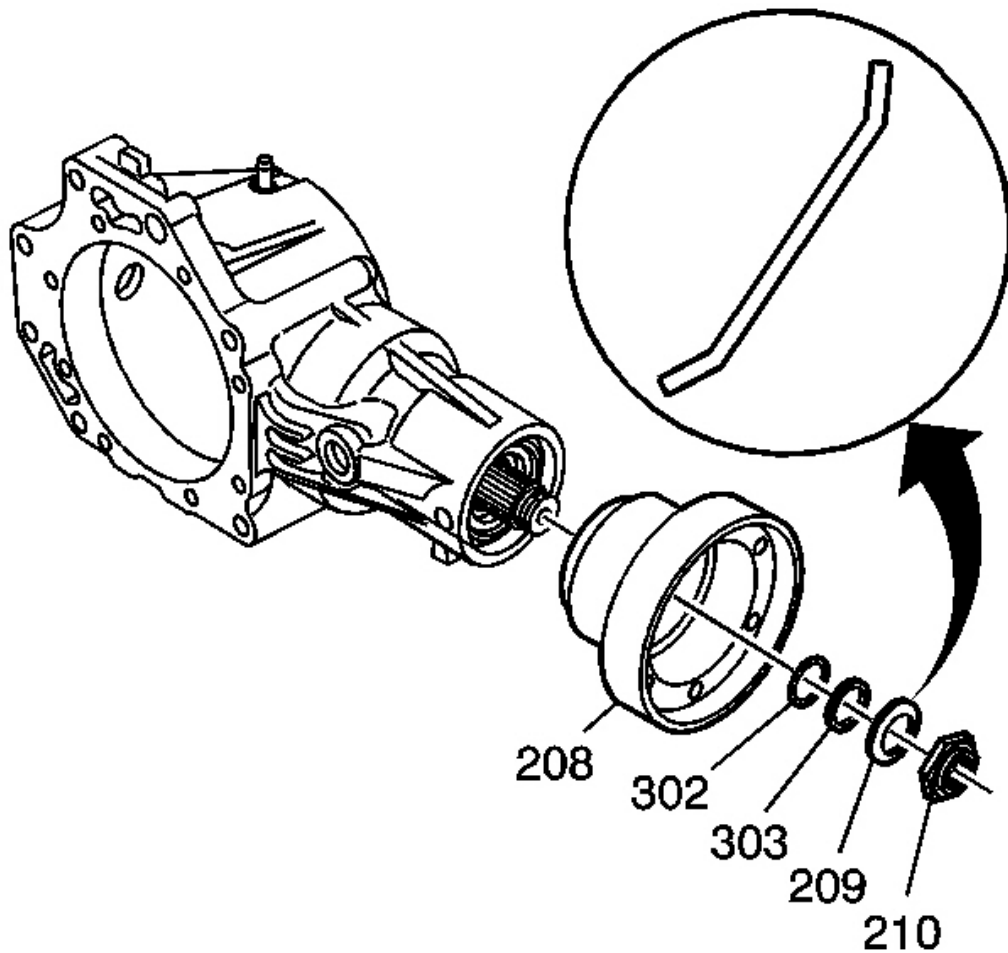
Removing/Installing Locknut, Washer, Sealing Washer, O-Ring & Output Yoke
